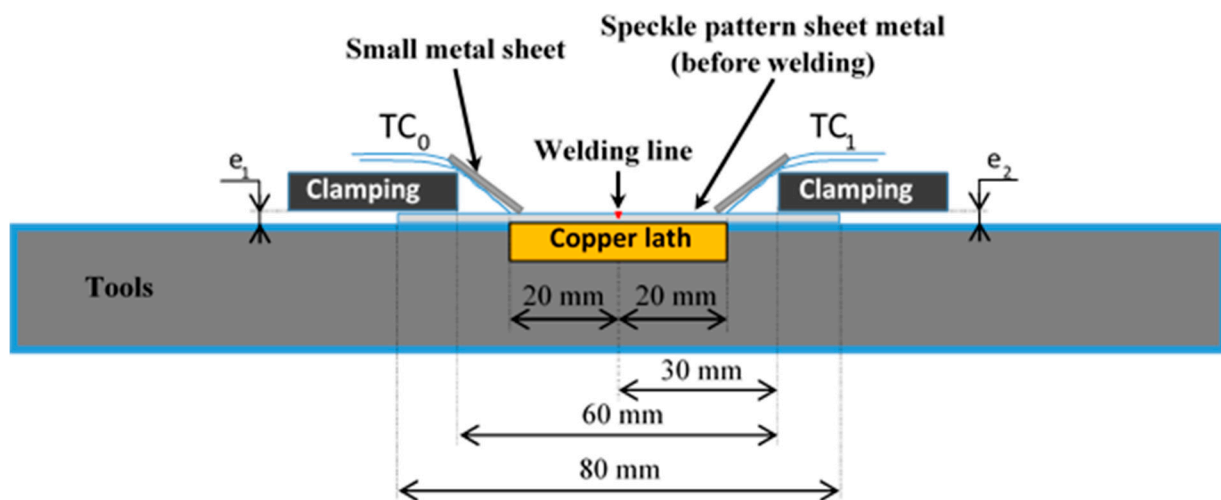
Schematic showing the positioning of thermocouples, protection, clamping, and copper lath.
